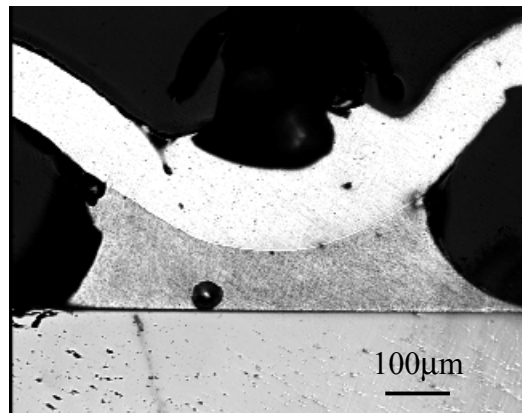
A zero-cycle Ag3.5-Sn96.5 dimple solder joint.
